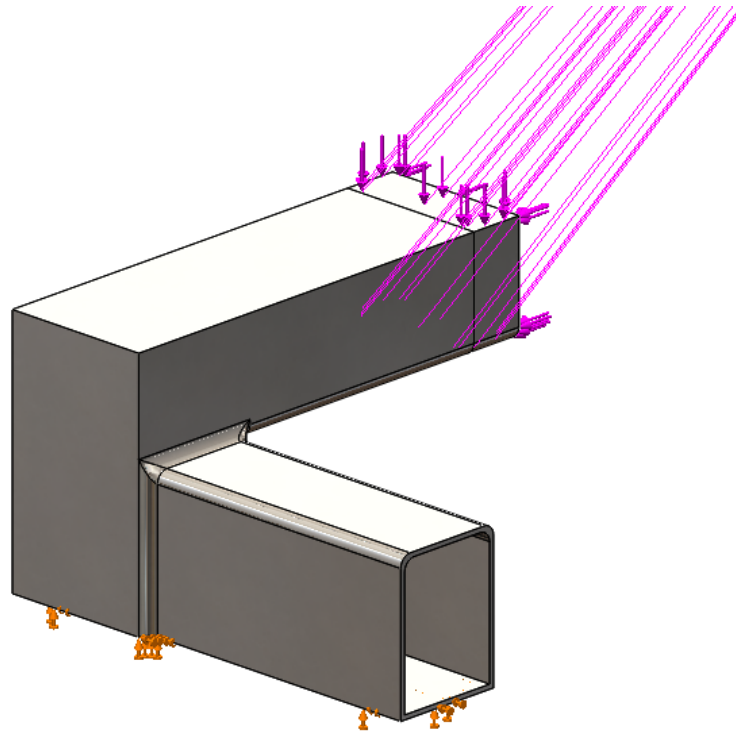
Bottom Frame weld FEA boundary conditions [3].
